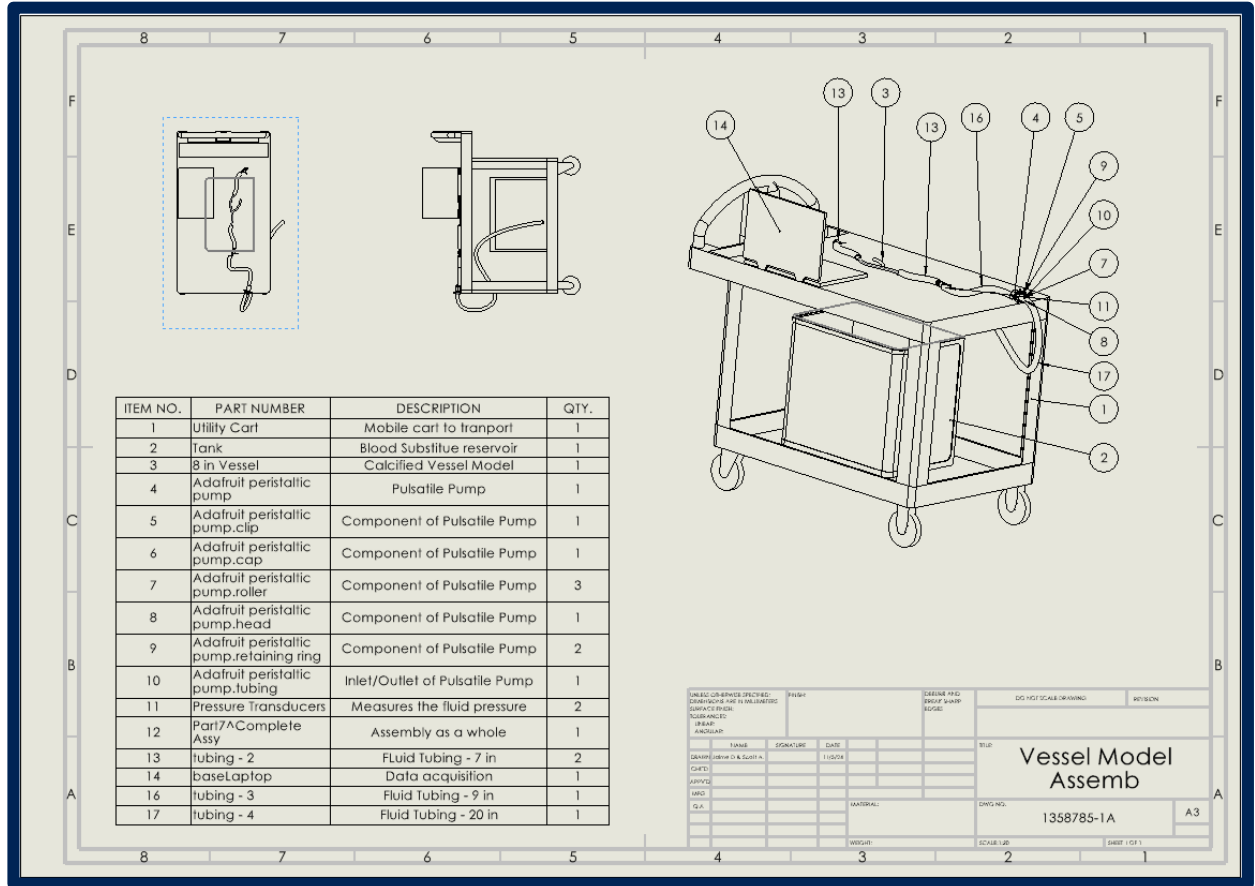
Drawing of Assembly [PN: 1358785-1A \_ Vessel Model Assy.]
